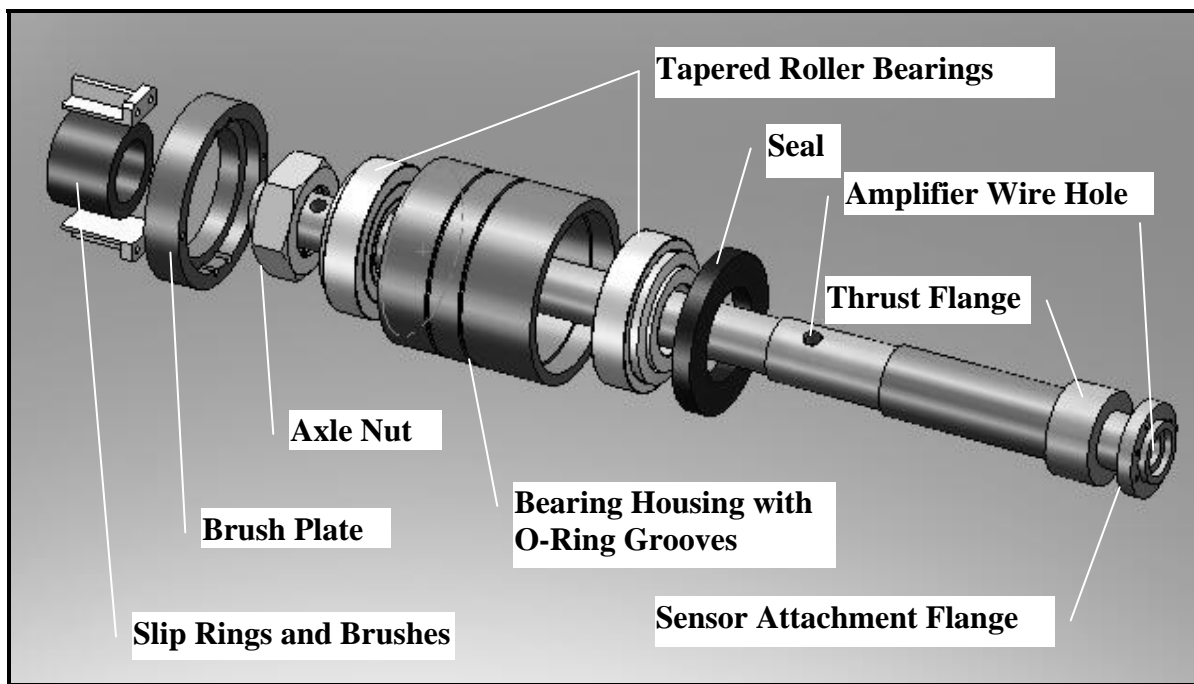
Driveshaft and Bearing Assembly with Brush Blocks and Slip Rings
